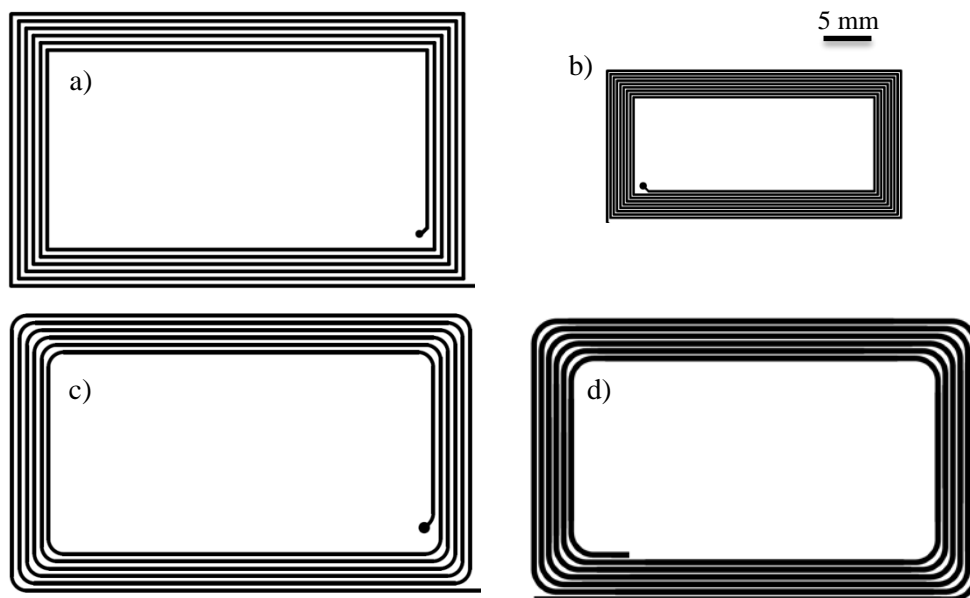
Layouts of the final antenna designs for milling on FR-4 substrate (a) (b), screen printing (c) and inkjet printing (d).
